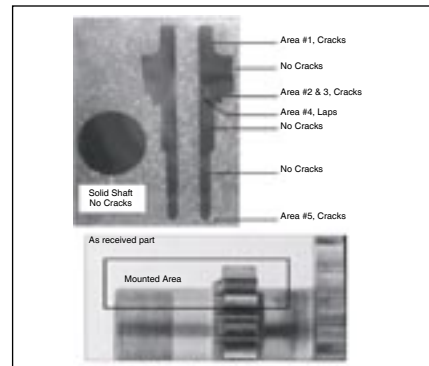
Locations of IGA and contact damage on gearshaft sections (top) taken from the gearshaft (bottom).
